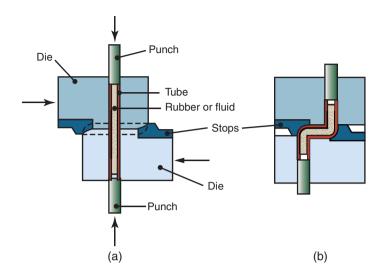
A method of forming a tube with sharp angles, using an axial compressive force. Note that the tube is supported internally with rubber or fluid to avoid collapsing during forming. *Source:* After J.L. Remmerswaal and A. Verkaik.
